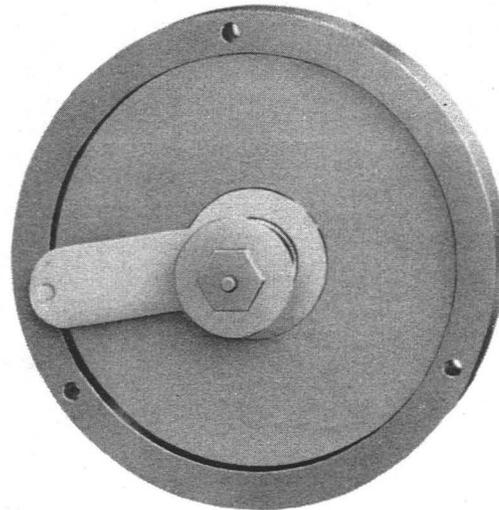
Speed Regulator End of KS-5099 Machines
